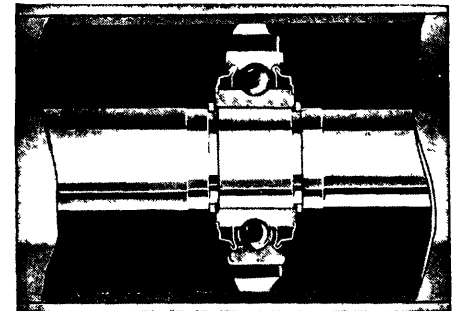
1949-52 propeller shaft center bearing. Series 40, 60 with ut Hydra-Matic
